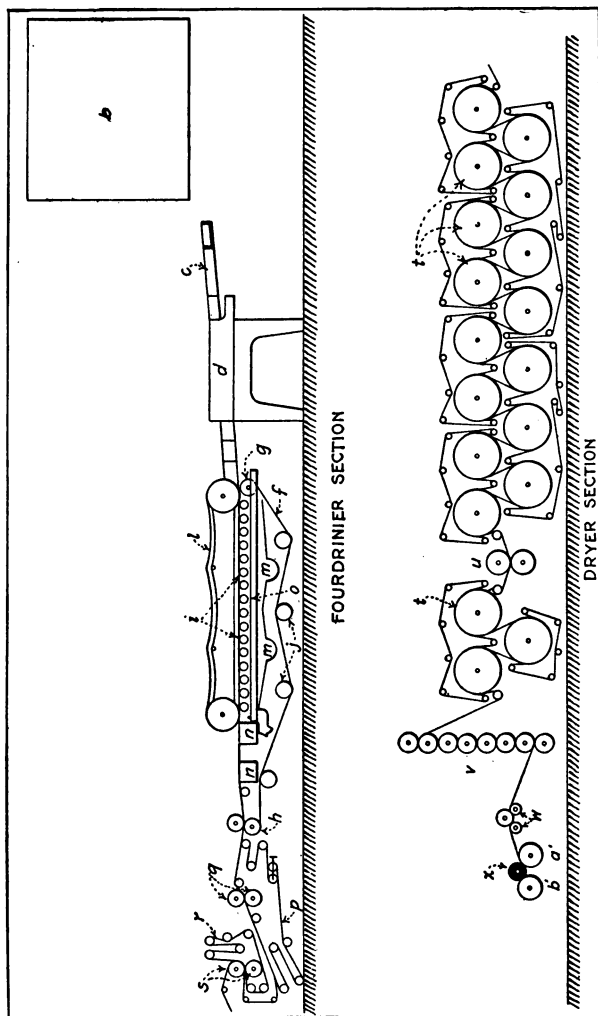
ELEVATION OF A FOURDRINIER PAPER MACHINE
